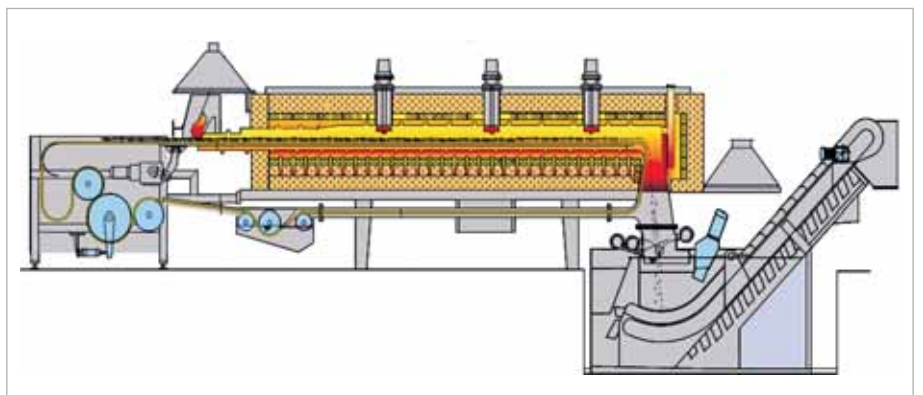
Section of a wire mesh belt hardening furnace with integrated oil quench for a throughput of 500 kg/h, fig. courtesy of Safed
